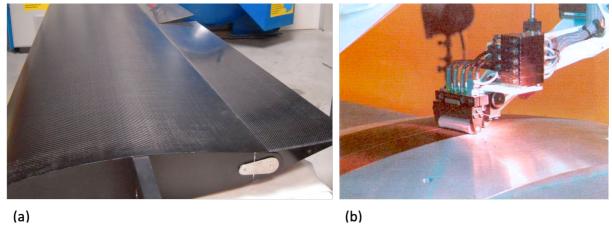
(a) Airplane wind in carbon fibber, and (b) mechanism head (roller) depositing varnish on the wing surface
